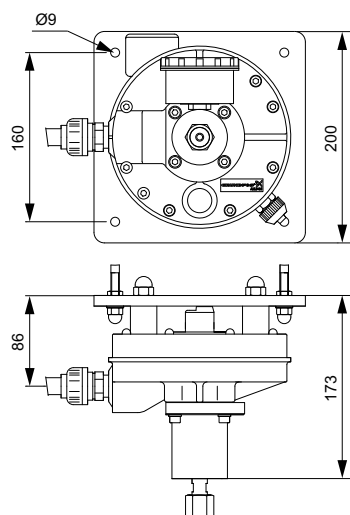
Vacuum regulator VGA-146 (wall mounting)
